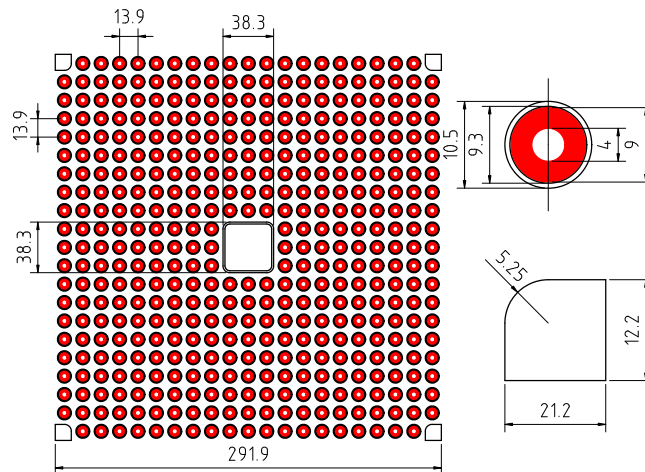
Cross-cut view of the preliminary ALFR FA and pin layout.
